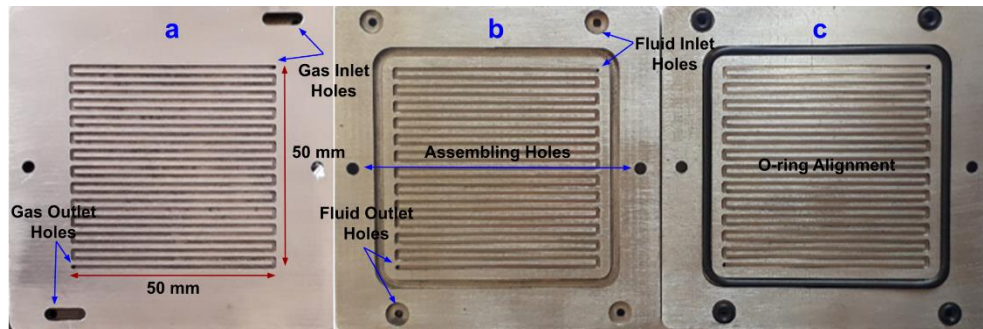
BP details; a) inner section details, b) outer surface details, c) O-ring alignment
